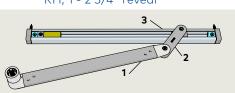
T275 – Splined pull arm assembly, RH, 1 - 2 3/4" reveal
